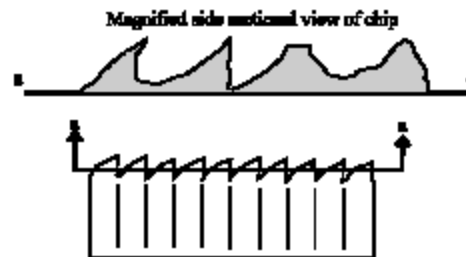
Schematic of chip showing sectioning for viewing side cross sectional view
